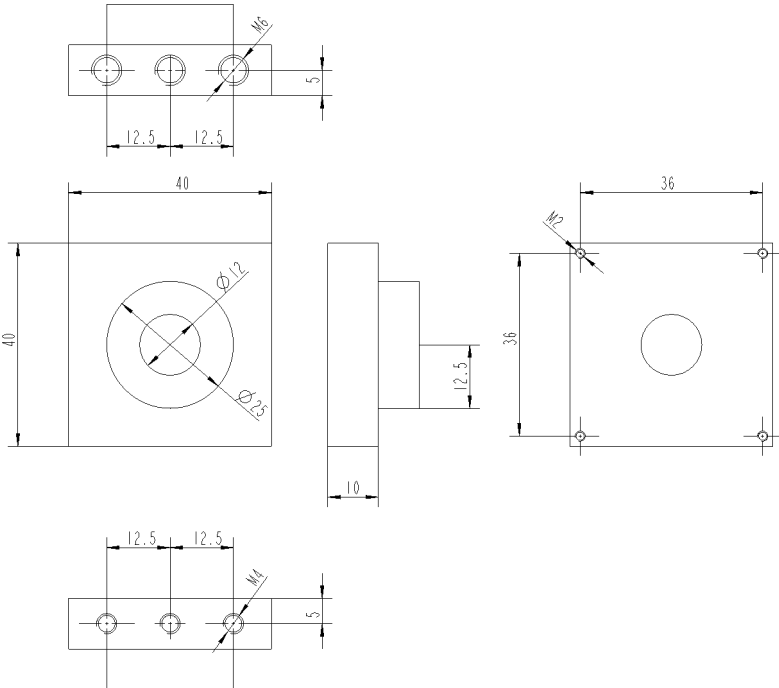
FIBERDOCK Mounting Adaptor main dimensions
